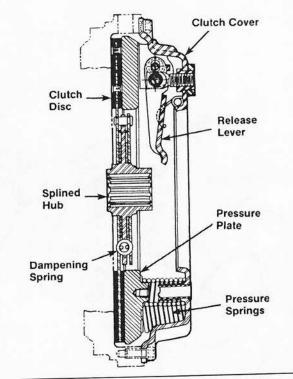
Cutaway of a 14-inch push-type clutch assembly on a pot (recessed) flywheel. (Courtesy of Haldex Brake Products, Inc.)
